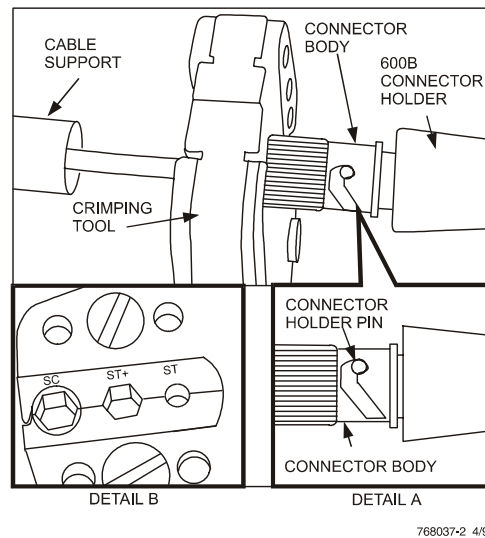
Crimp Cable Sleeve (Single-Fiber Cable)
